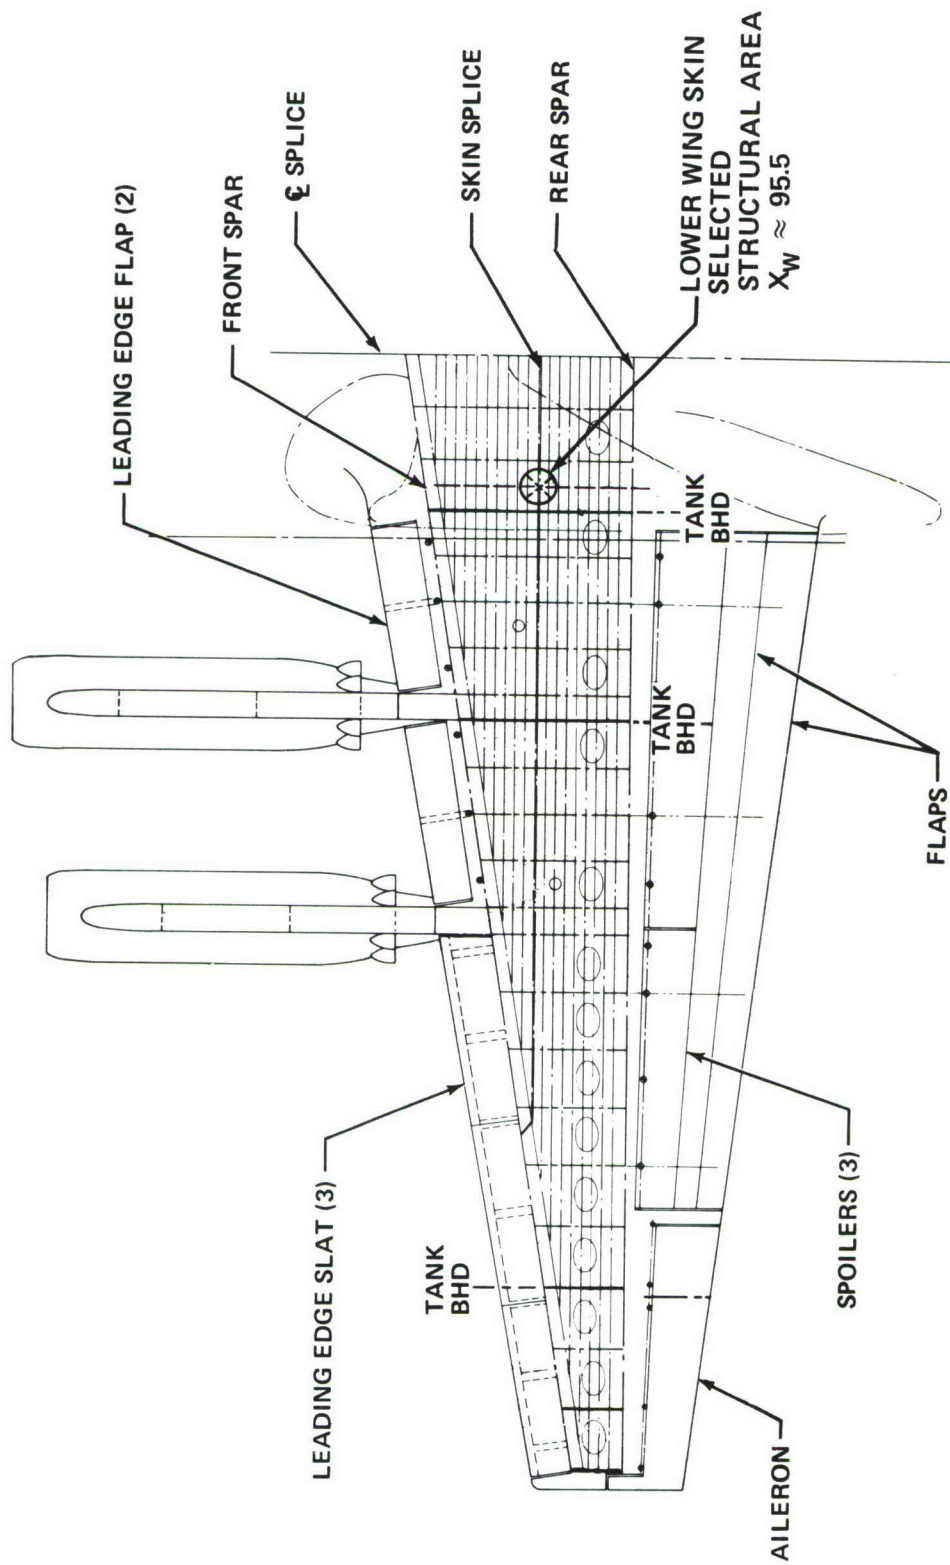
C-15 WING STRUCTURAL ARRANGEMENT
